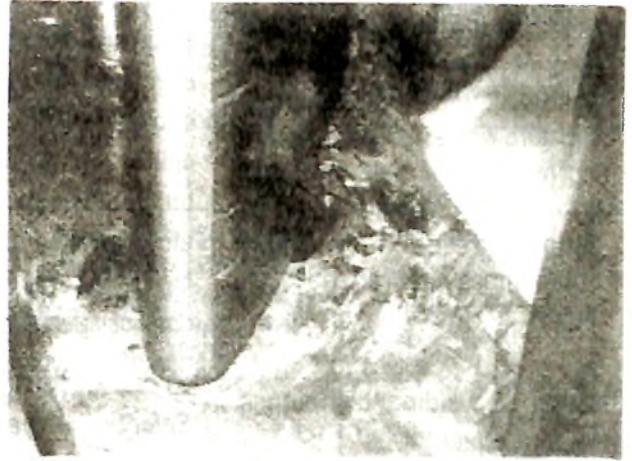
Damages on Lower Ring & Runner inlet (Salal H.E. Project)
